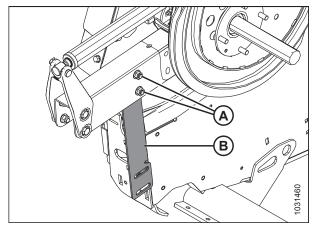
Outboard Reel Arm Support – D1X Header Shown
